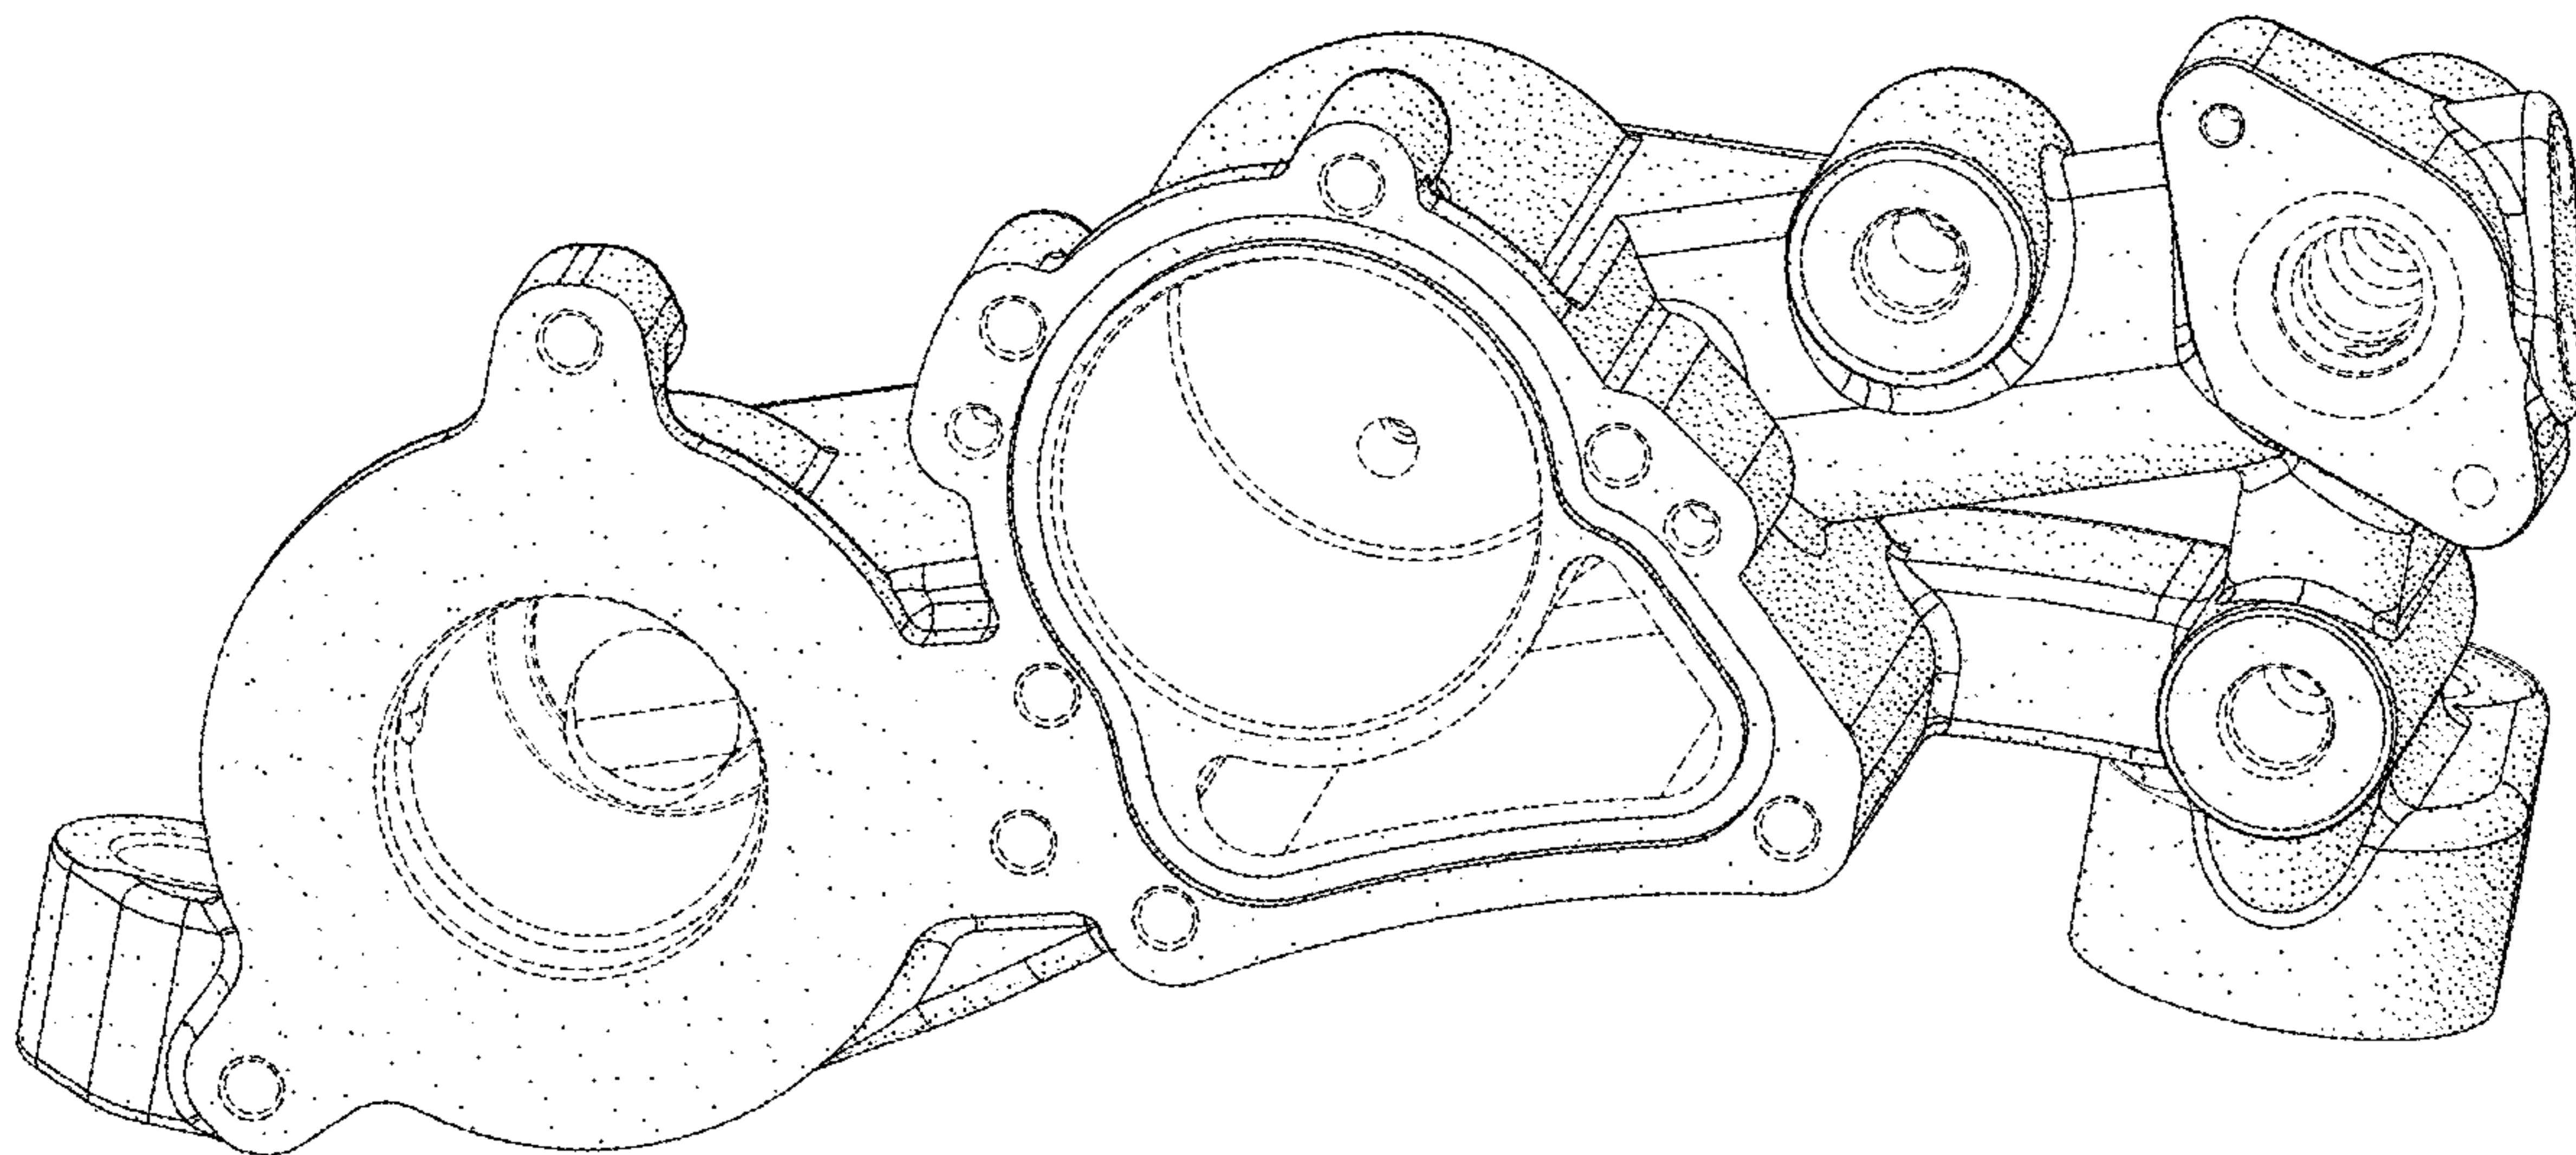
is a front perspective view of a hydraulic control unit showing the new design.
